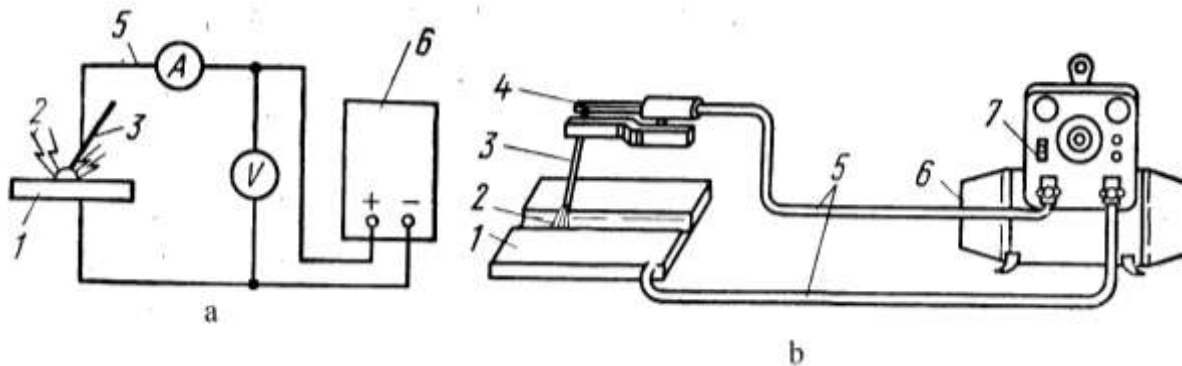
Arc power supply diagram for manual arc welding (direct current):
